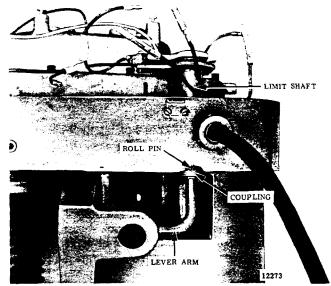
View showing Pinned Coupling between Limit Shaft and Lever Arm.
